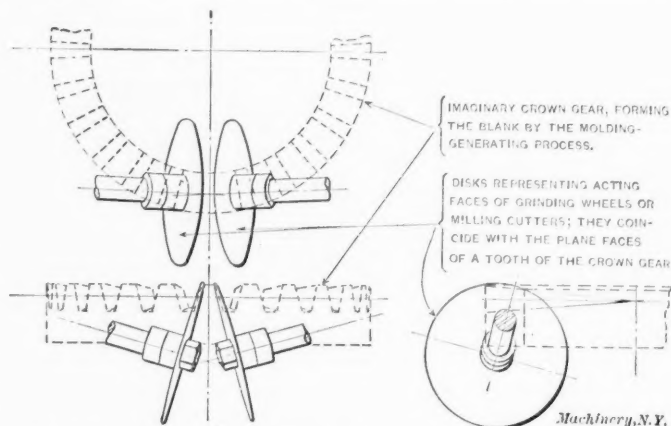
Diagram suggesting the Arrangement of Milling Cutters or Grinding Wheels for Forming the Teeth of Bevel Gears by the Molding-Generating Process.
